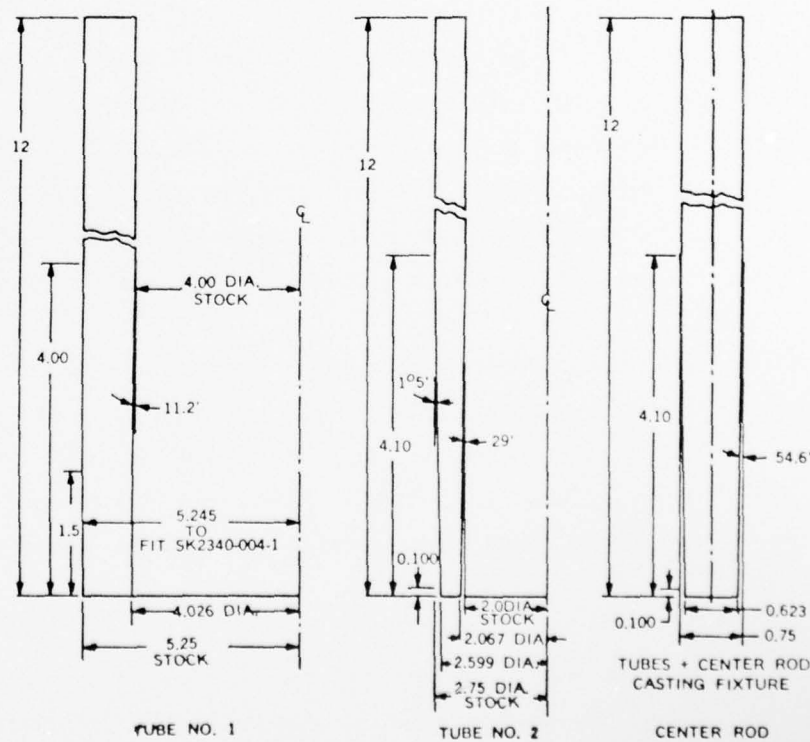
Tubes and Center Rod of Casting Fixture SK2340-004-1
